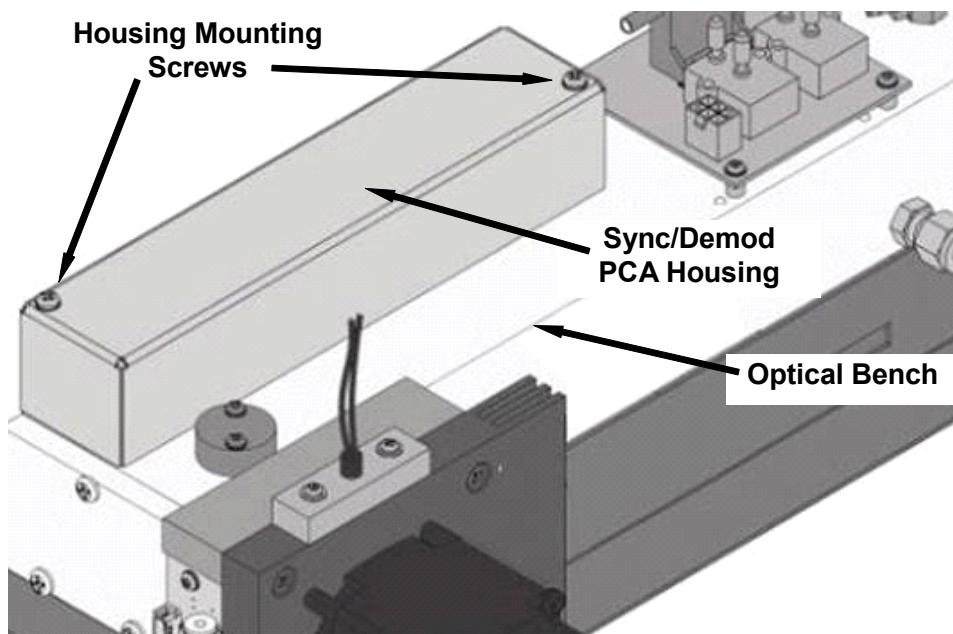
Location of Sync/Demod Housing Mounting Screws
